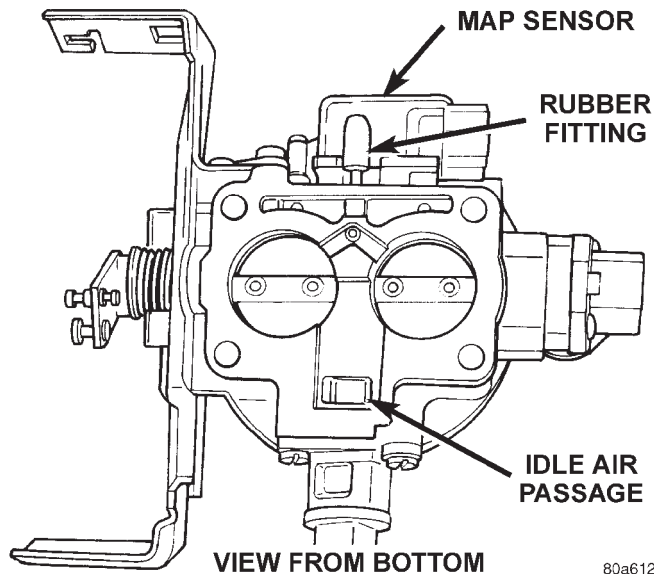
Throttle Body Air Control Passage—5.2L/5.9L Engines—Typical
